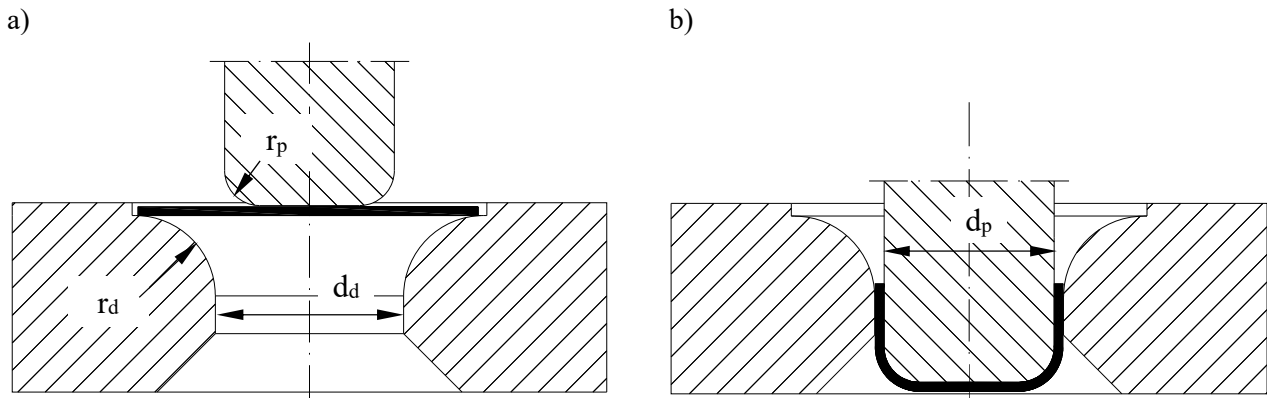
Forming a drawpiece without a flange initial stage (a) and final stage (b)
